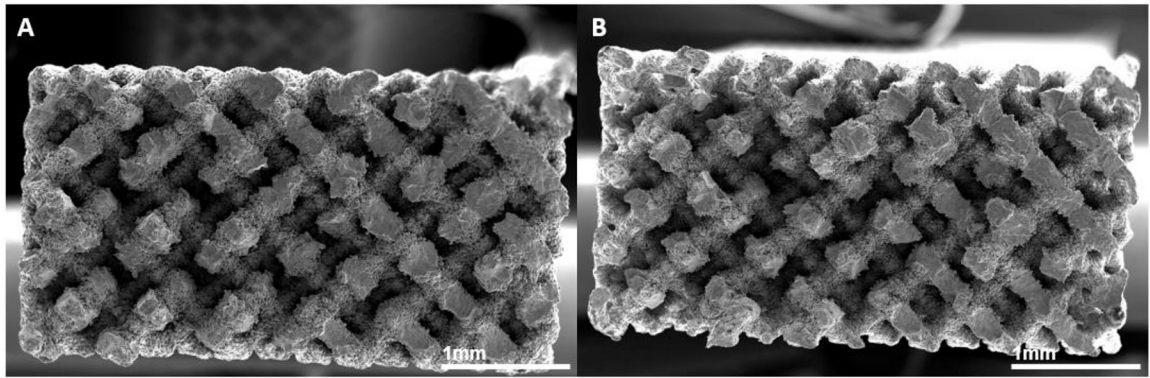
Fracture surfaces of fully porous high cycle fatigue samples, (A) no treatment, (B) SILC cleaned.
